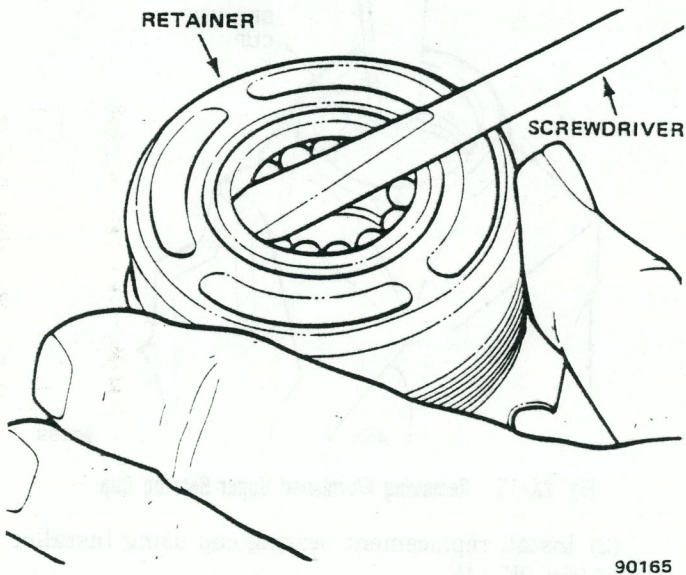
K-8 Removing Wormshaft Lower Bearing Retainer
